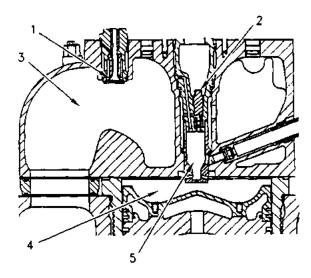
(1) Gas admussion valve. (2) Check valve. (3) Inlet air. (4) Main combustion chamber. (5) Precombustion chamber.
